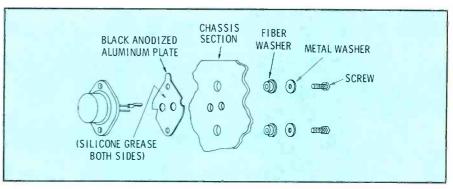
Typical method of mounting replacement transistor to heat sink.
